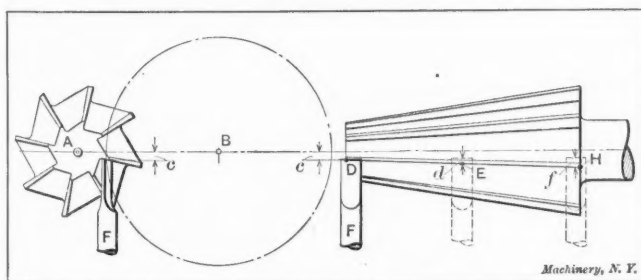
Illustration showing Conditions when Grinding a Taper Reamer by Method shown in Fig. 1
